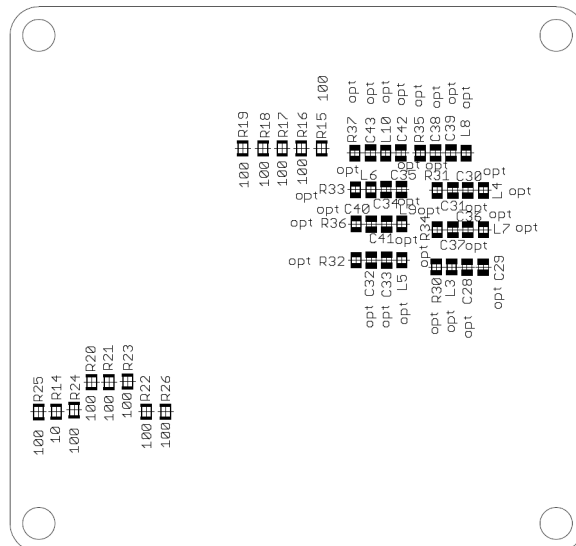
Assembly diagram: Capacitive Front-End IC, CapIC, bottom side.
